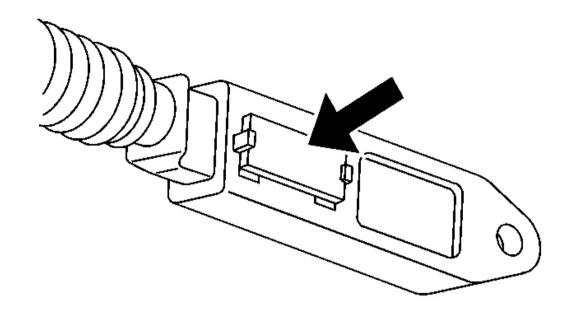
Depressing The Shift Control Cable Adjuster Lock Courtesy of GENERAL MOTORS CORP.
